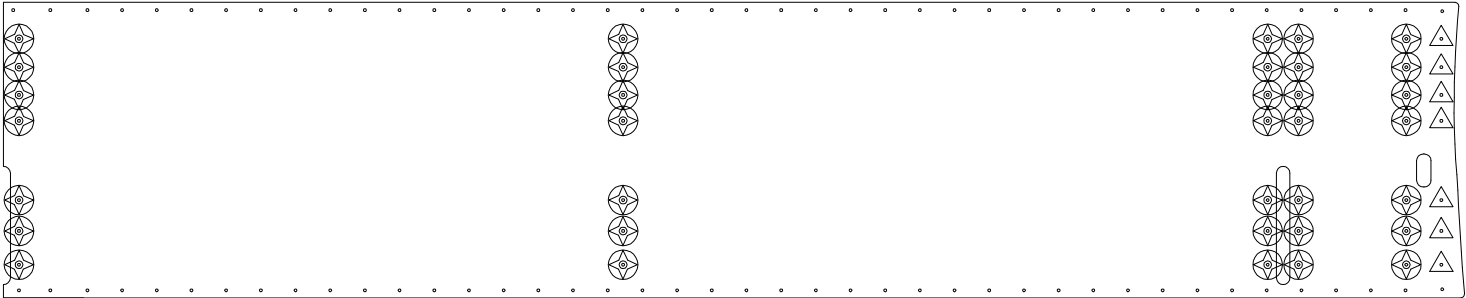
FL-1001A-L INBOARD NOSE SKIN RIVETS
